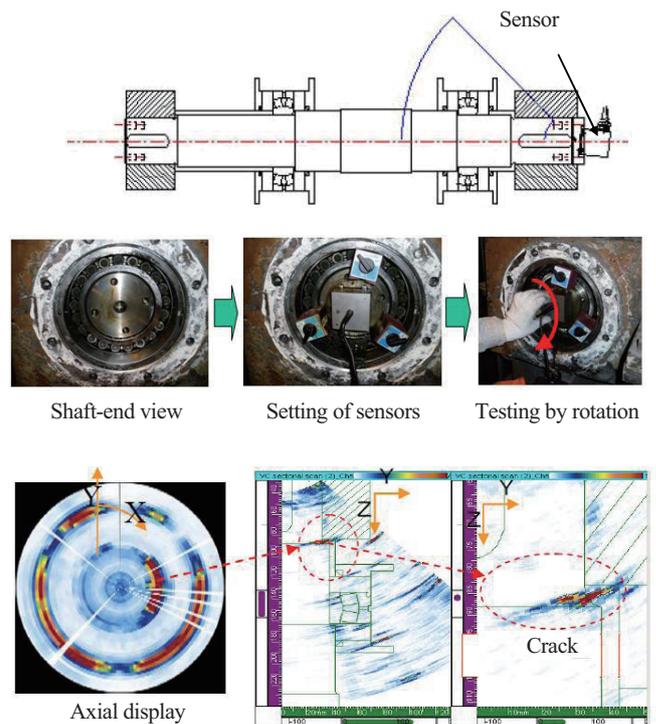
Example of phased array ultrasonic testing from shaft-end
